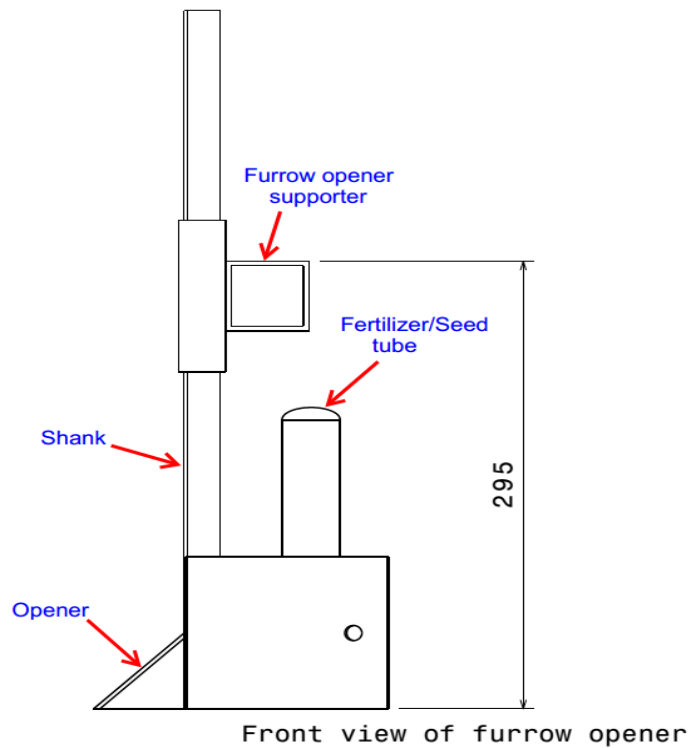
Shoe type furrow Opener (dimensions are in mm)
